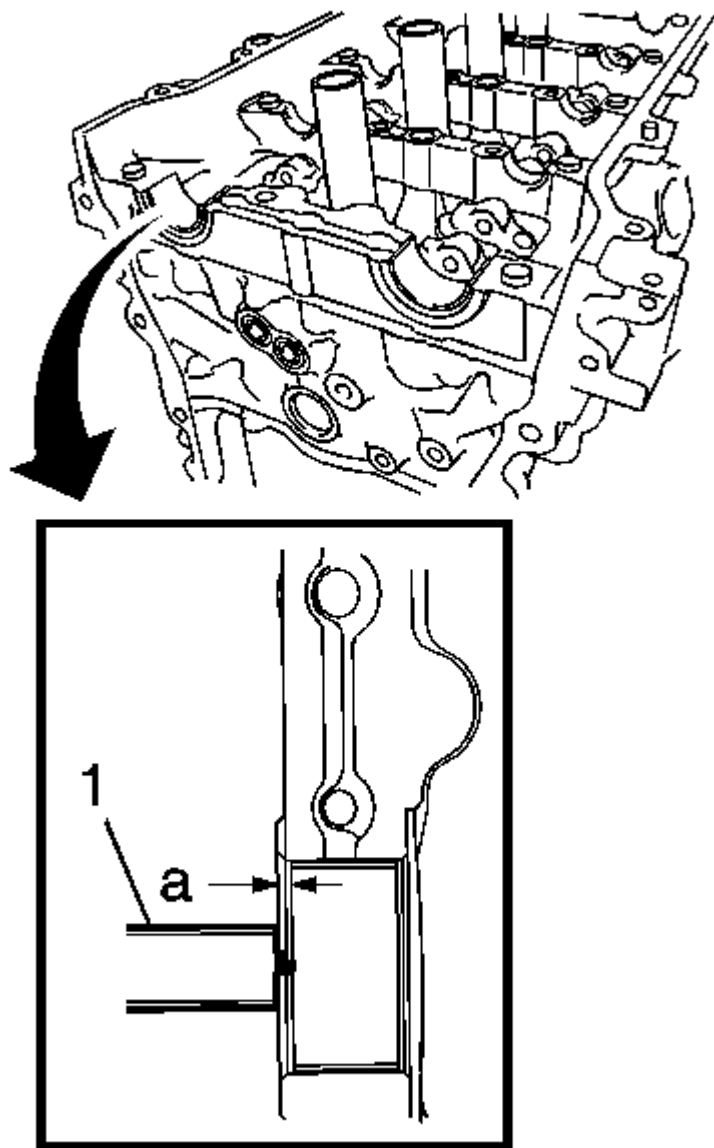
Measuring Distance Between Bearing Cap Edge & Camshaft Bearing Edge
